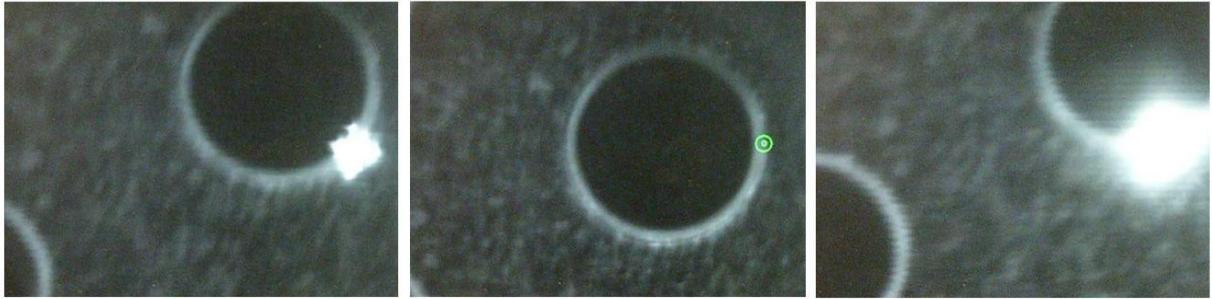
Automated laser welding positioning with computer vision software.
